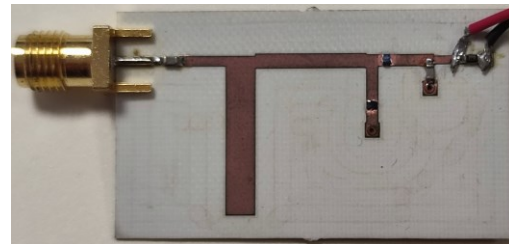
Manufactured PCB of the designed RF-DC converter.
